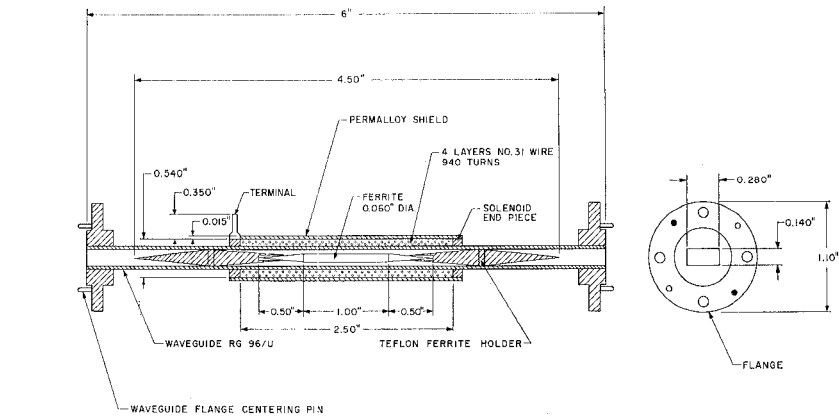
Assembly drawing of the  $K_a$ -band phase shifter.
